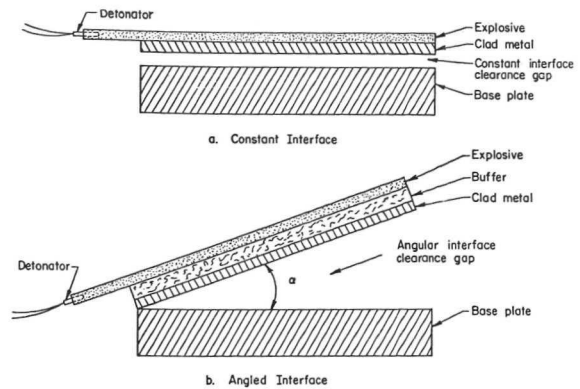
Explosive-metal geometries utilized to accomplish explosive bonding.
